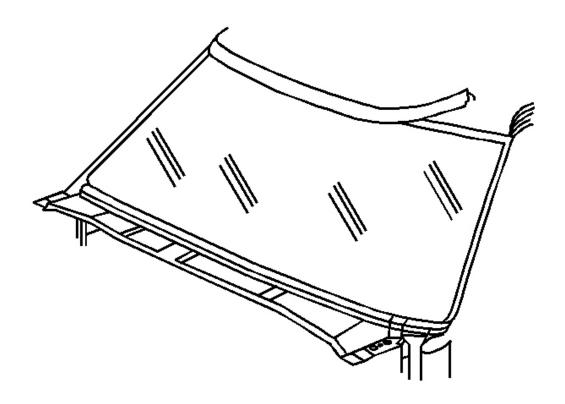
View Of Window Reveal Molding Courtesy of GENERAL MOTORS CORP.
